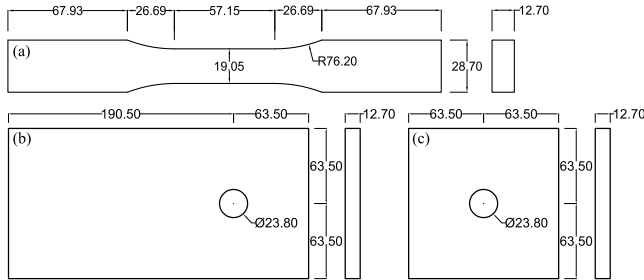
Nominal dimensions of test specimens: (a) Tensile coupons (b) Bearing plates and (c) Square plates (Units: in mm).
